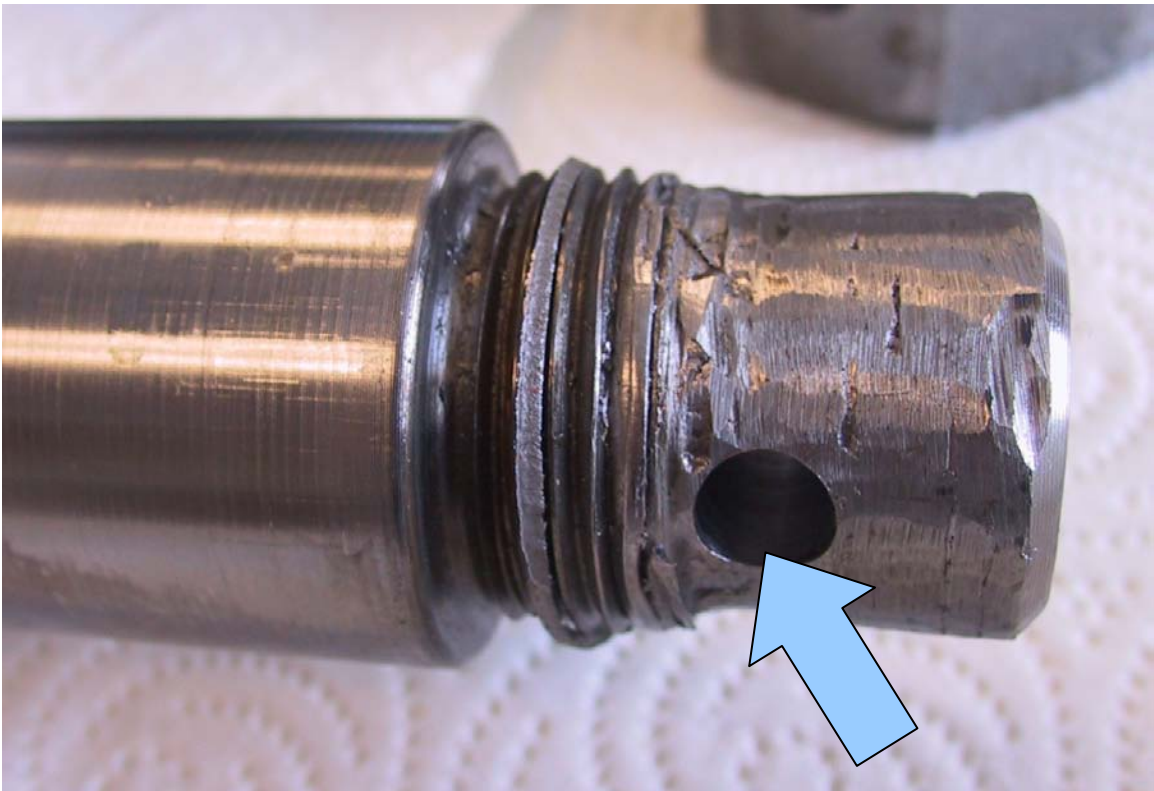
The thread of the failed cylinder rod was ground off and a hole had been drilled through the rod.
